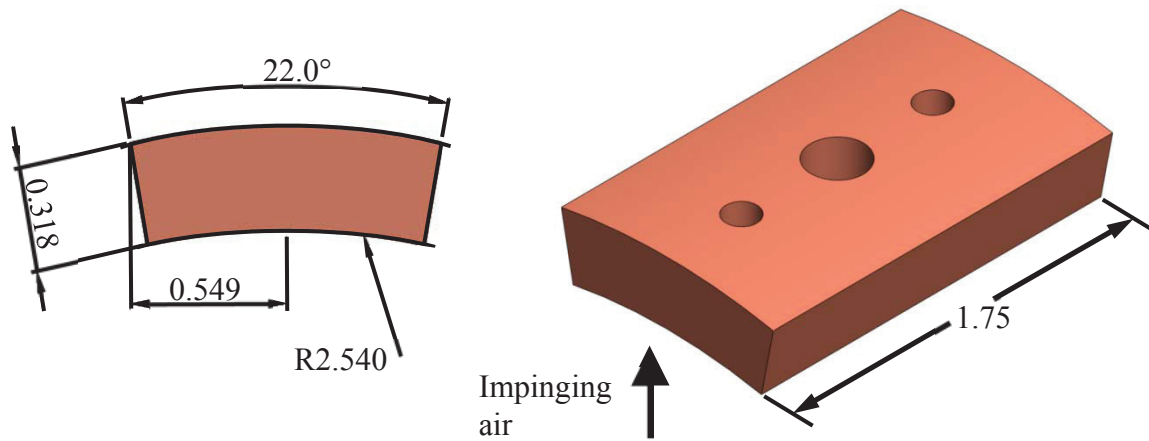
Detailed view of aluminum plate (dimensions in cm).
